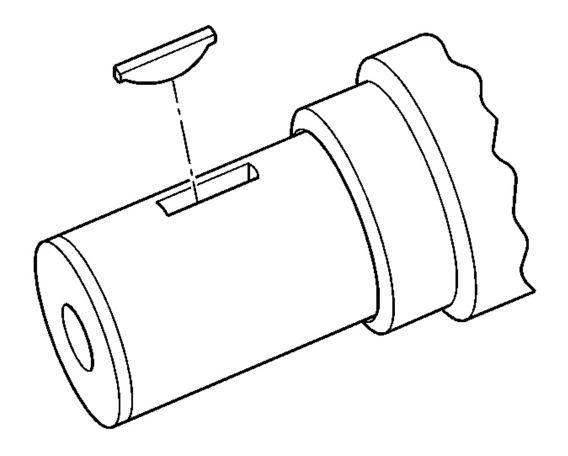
View Of Crankshaft Key & Keyway Courtesy of GENERAL MOTORS CORP.
